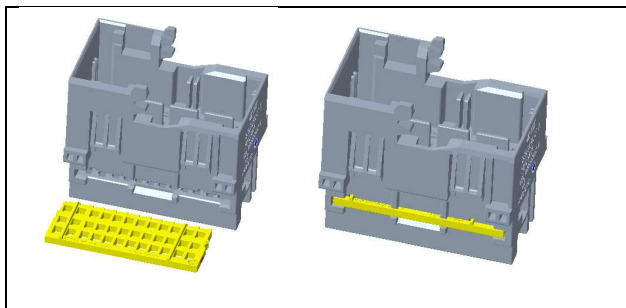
Drawing 2366066:Receptacle Connector
